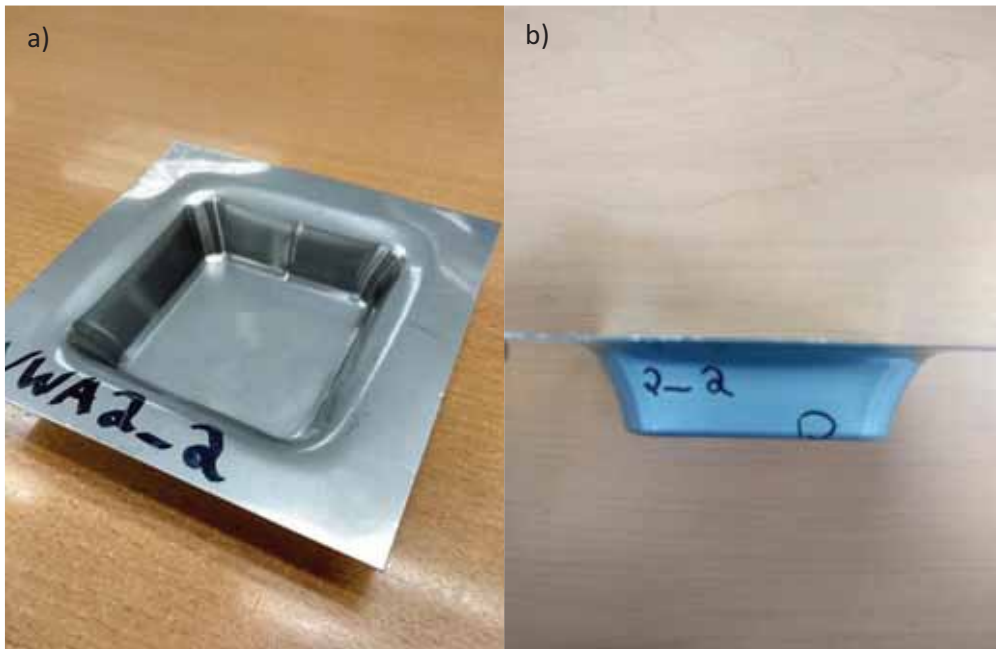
a) Pyramid Frusta B2 b) circled Fracture.
